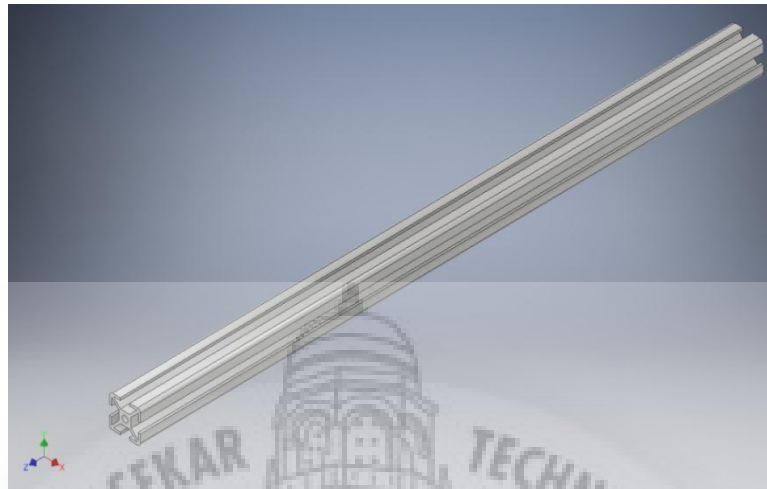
Aluminium T-Slot Extrusion CAD Drawing.
